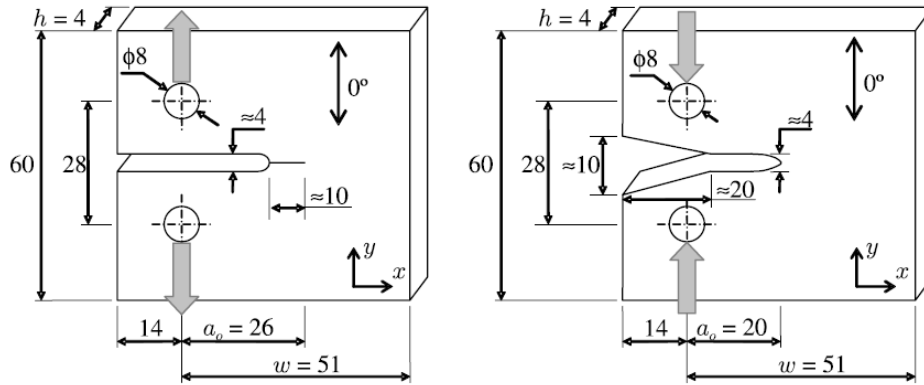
Dimensions (mm) for Tensile (left) and Compression (right) tests [12]
